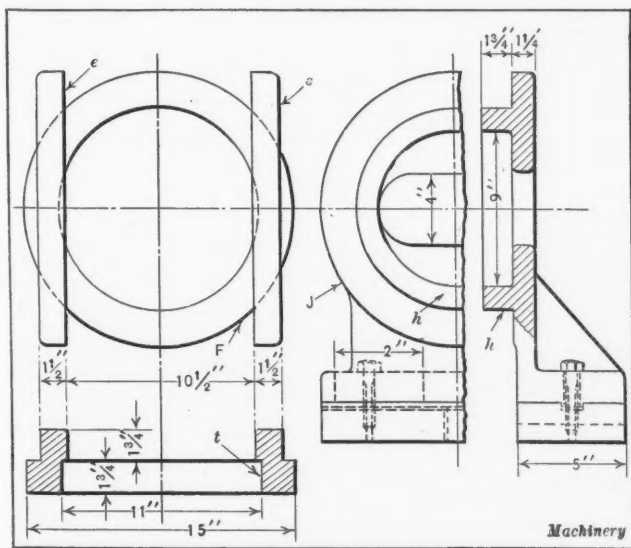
Carrier-ring and Back Plate of Attachment shown in Figs. 1 and 4
